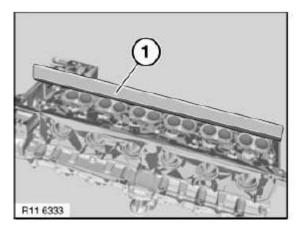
Checking Evenness Of Cylinder Head Sealing Faces With Standard Straight-Edge
